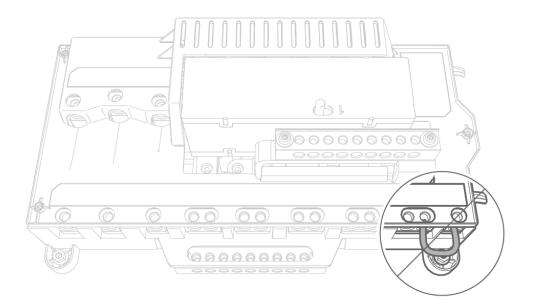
Neutral to Switched Earth (N-PE) Jumper should not be in place
